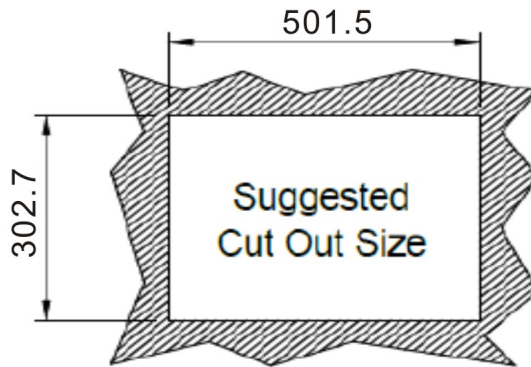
AFL3-W15C-ULT5 Cutout Dimensions
